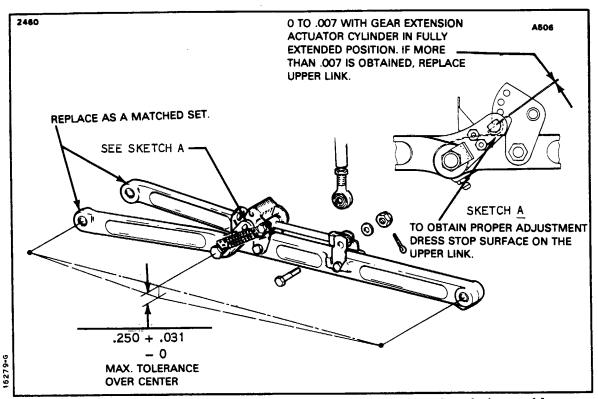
Adjustment of Nose Gear Drag Link and Latch Assembly
